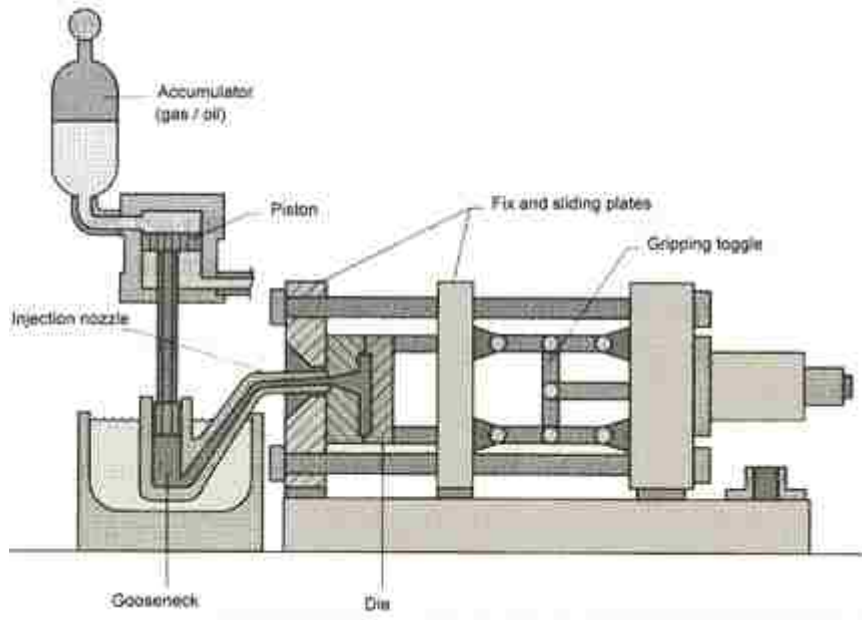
2. Schematic diagram of hot chamber die cast machine [16].
